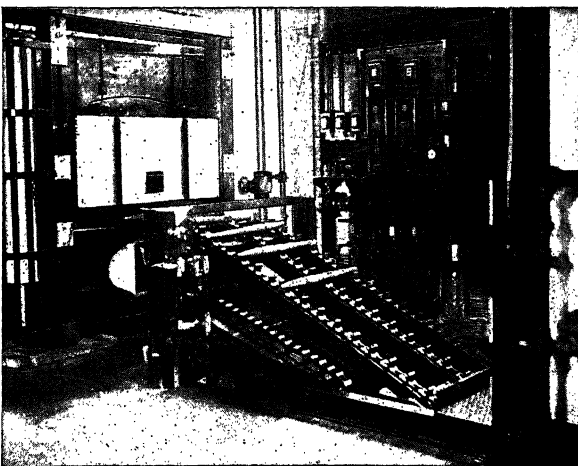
Chain conveyor for handling automobile drive shafts from a quench tank to a draw furnace.
